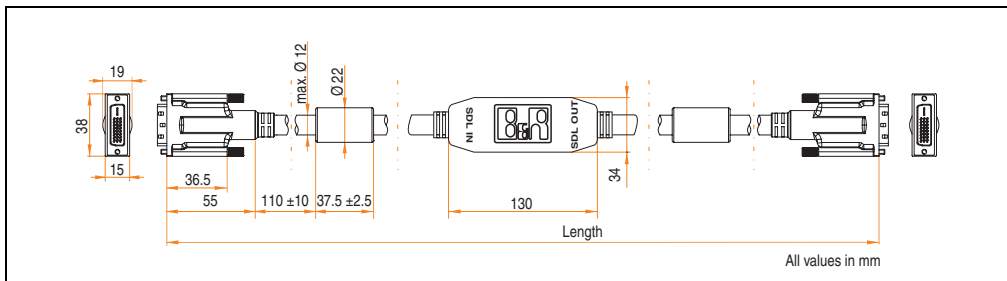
Dimensions - SDL flex cable with extender 5CASDL.0x00-13
